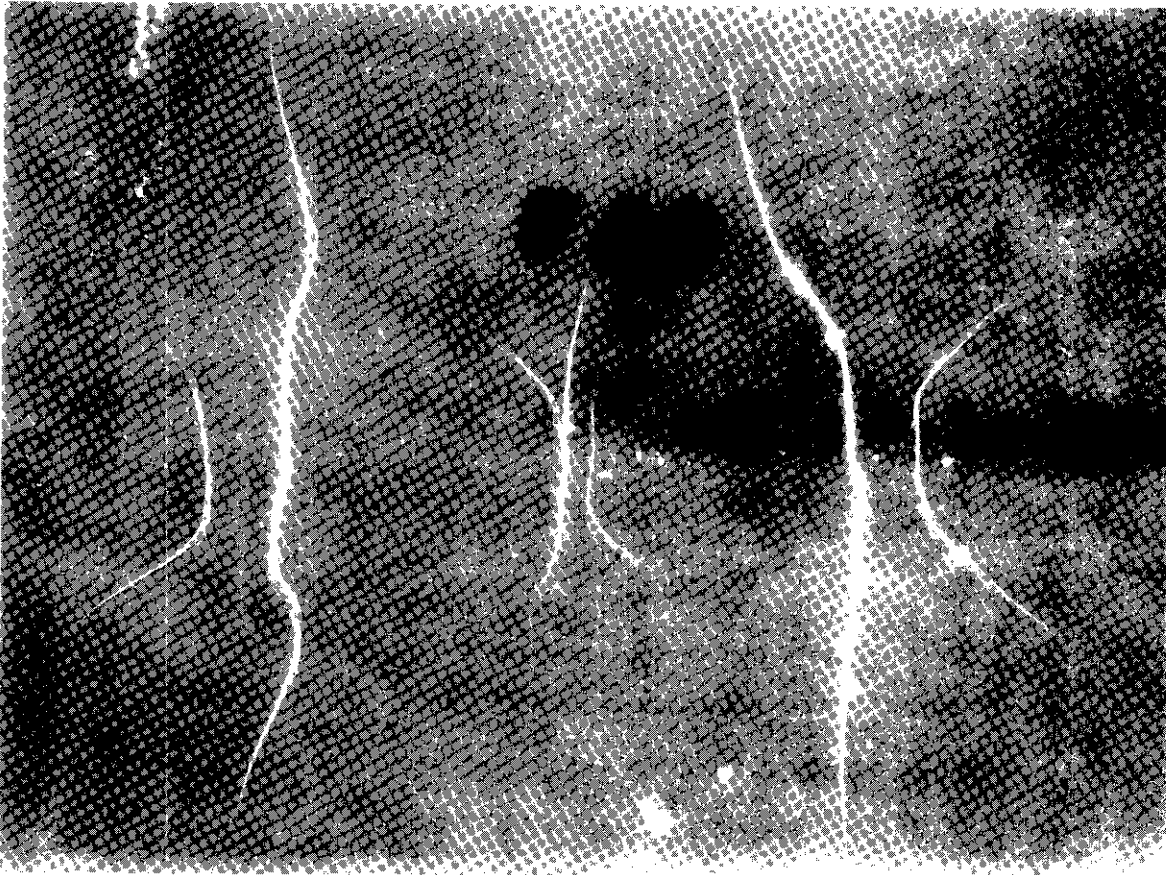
Radiograph of simple butt joint (Specimen F41) of heat-treated SAE 4340 steel after stress-corrosion-cracking test for 180 hours. .04 X
